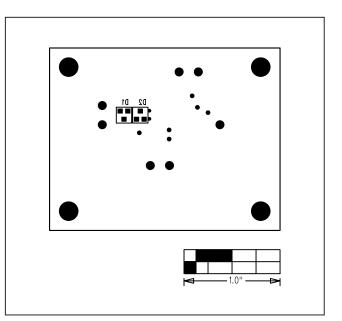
MAX9945 EV Kit Component Placement Guide—Solder Side
